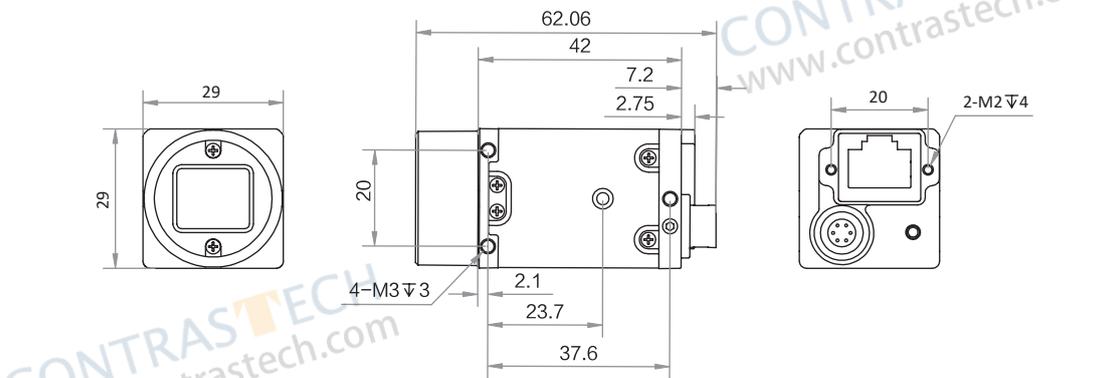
Mechanical Dimensions of the C-mount GigE Cameras with 29\*29\*42mm housing (The installation uses M3 screws).
